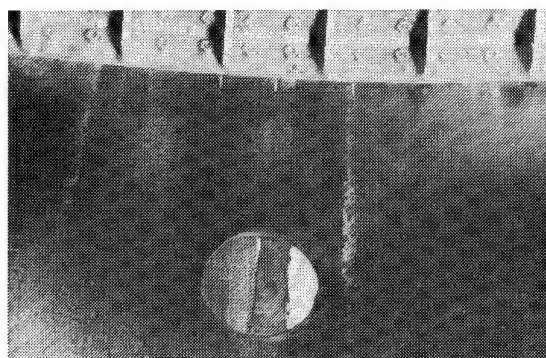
Three Inch Diameter Hole in DMATS Lower Skin Panel for Repair Demonstration
